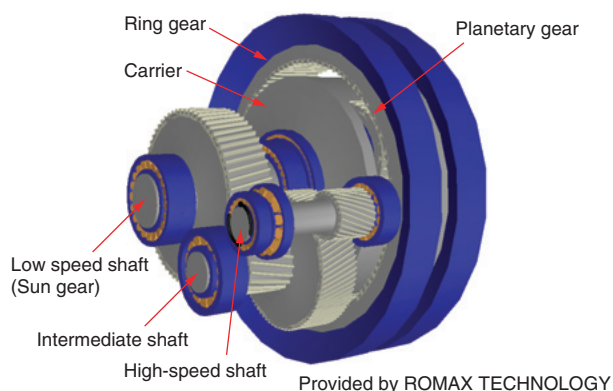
Example of 3-D analysis model of gearbox⁶⁾
